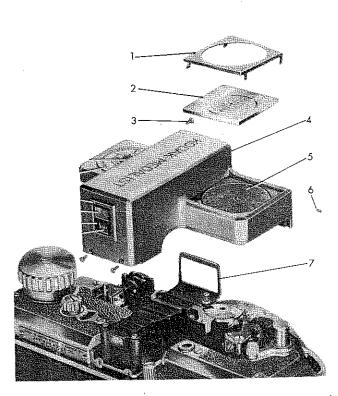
Direct View Finder Cover Assembly, Exploded from Camera
